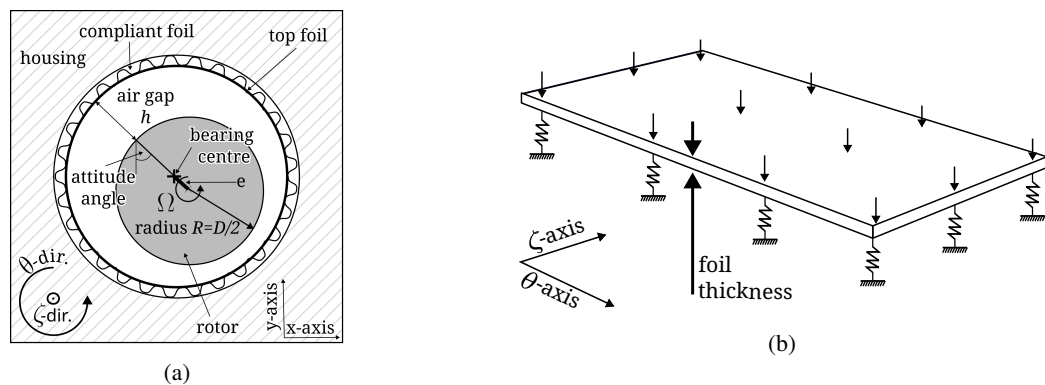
Rotor bearing system (a) and top foil supported by springs with pressure acting on the top side (b).
